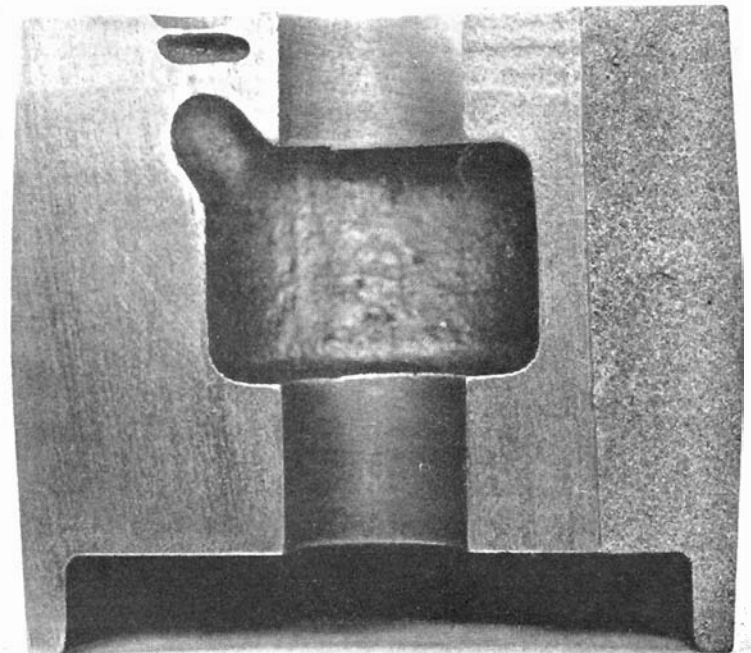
Large blowholes produced in a grey-iron pulley wheel casting by gas evolved from a core.
